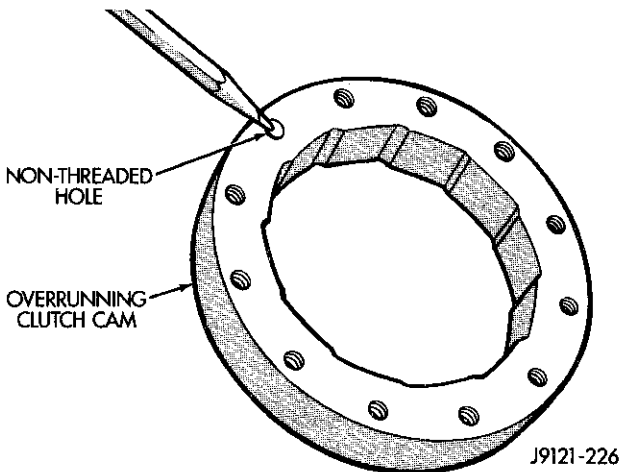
Location Of Non-Threaded Hole In Clutch Cam
